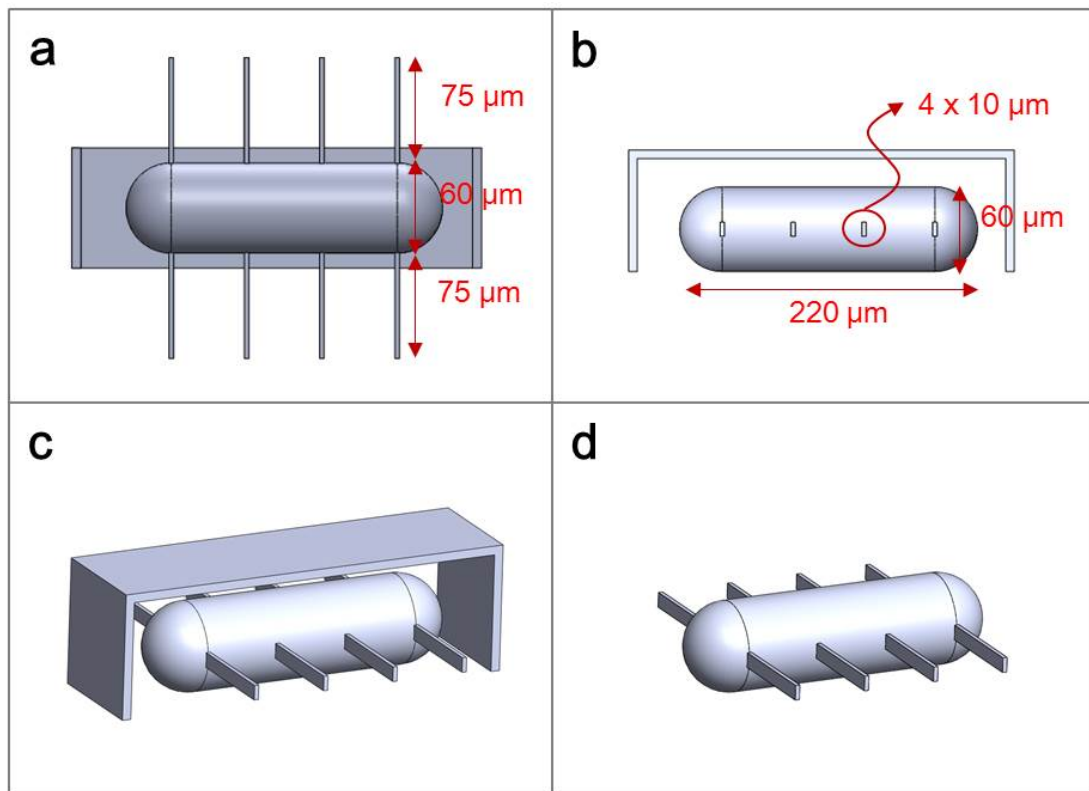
CAD layouts of ciliary microrobots. (a) bottom view, (b) side view, (c) 3D view with mask structure, (d) 3D view without mask structure [43].
